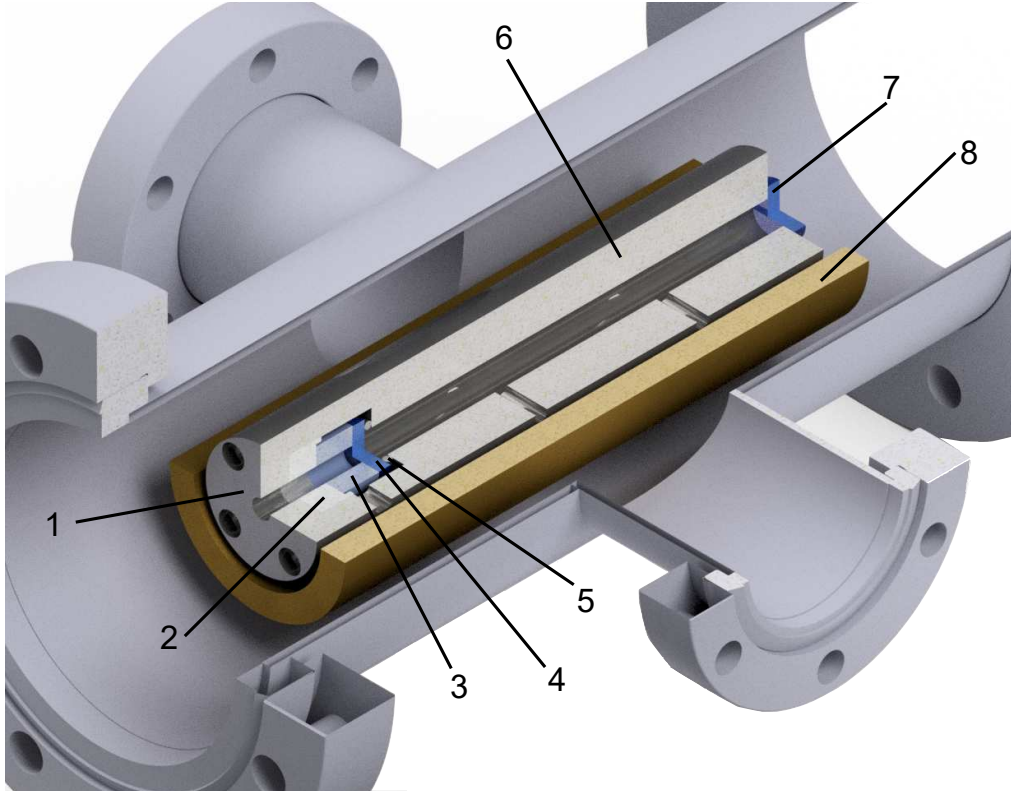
A section view of the transfer cavity CAD assembly. (1) Spacer cover. (2) Aluminum compensating element. (3) Cylindrical piezoelectric transducer. (4) Mobile mirror. (5) Rubber O-ring. (6) Invar spacer. (7) Fixed mirror. (8) Cavity support.
